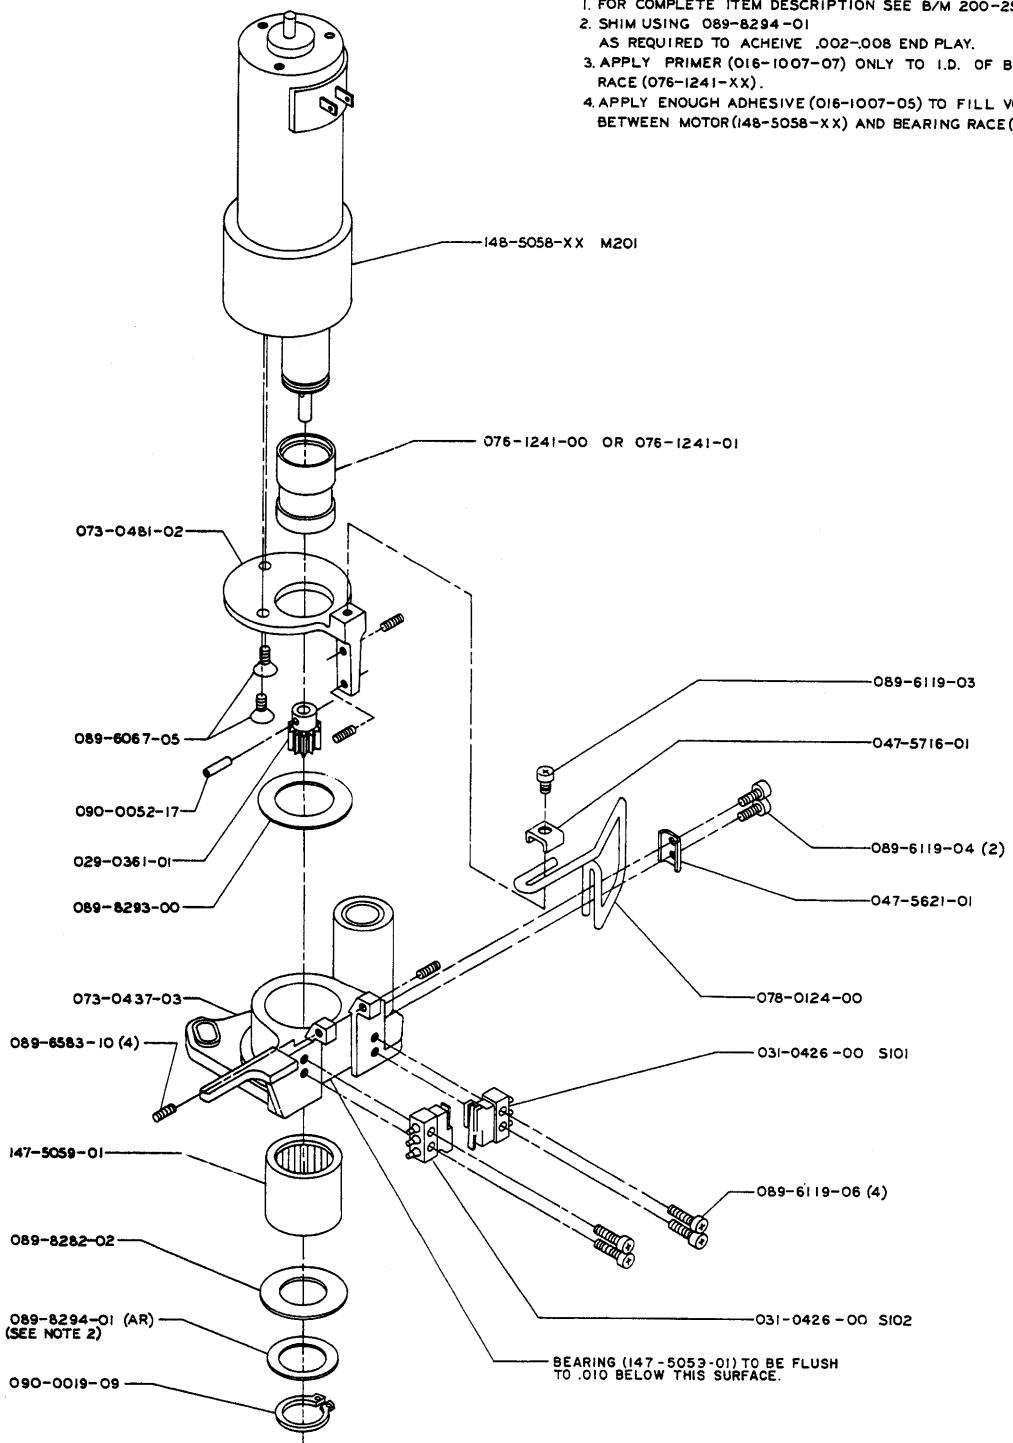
ENGAGE PLATE ASSEMBLY
